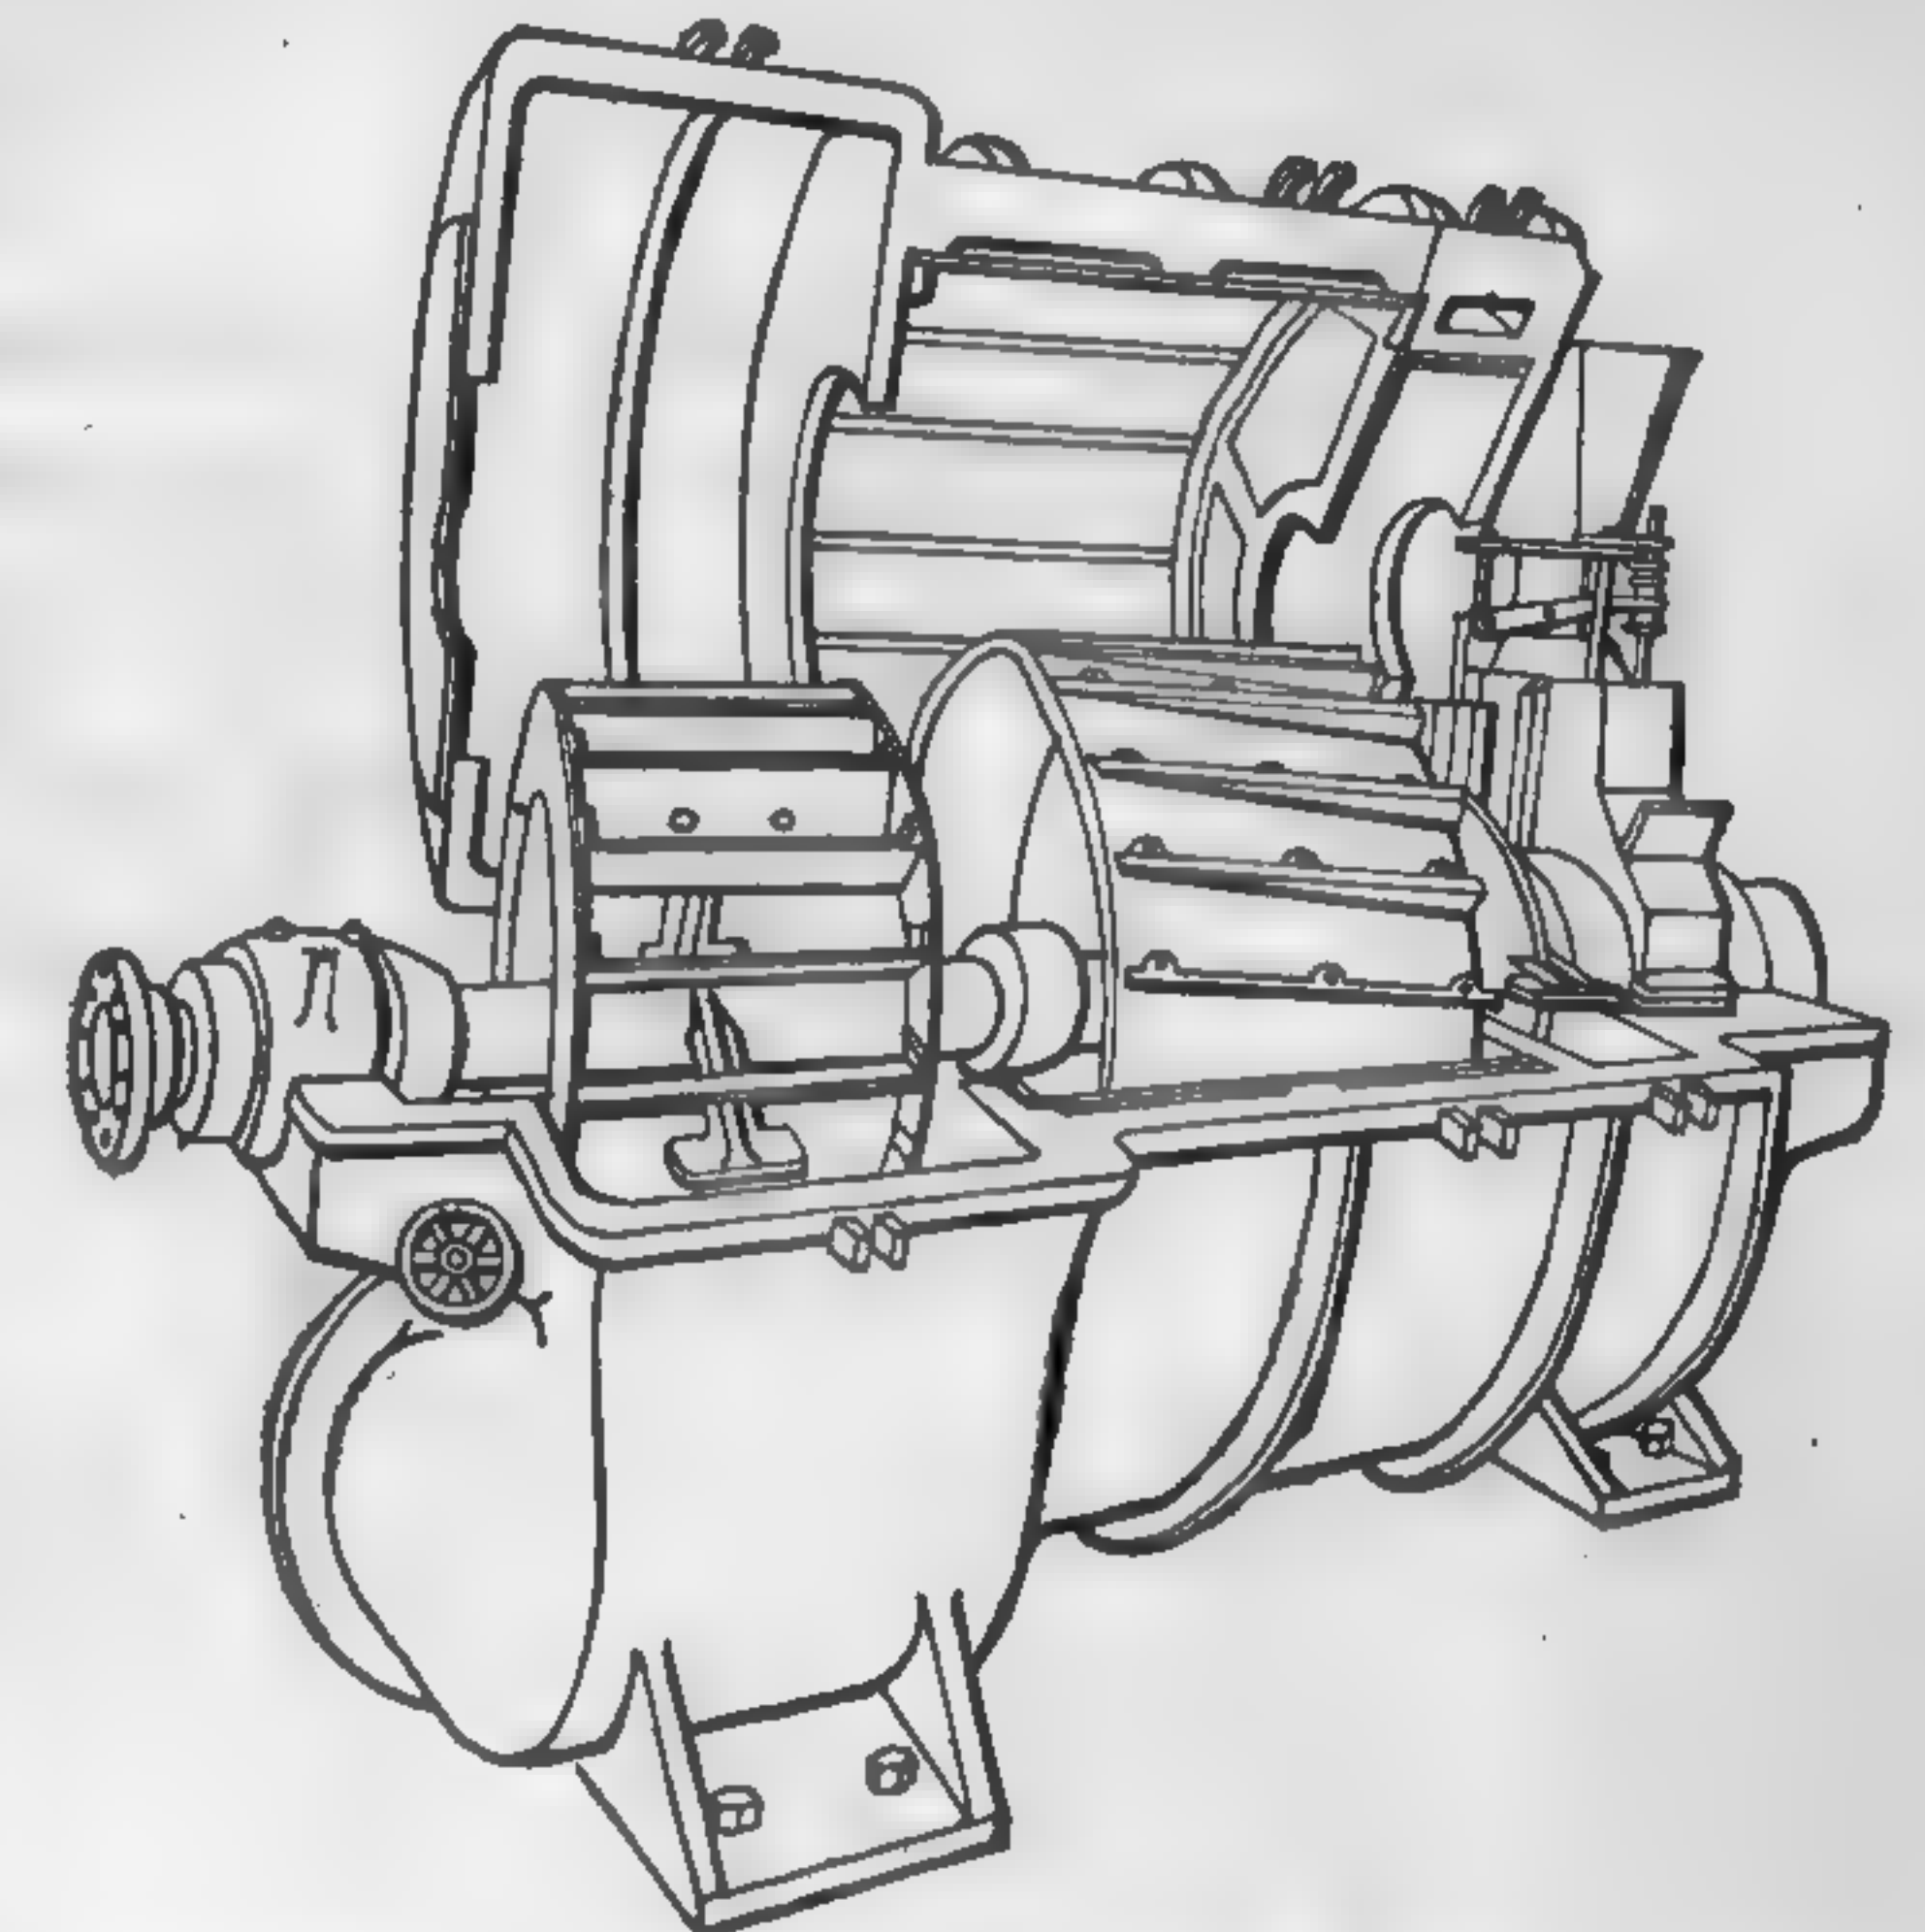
Seymour Coal Pulverizer — Unit Type.
